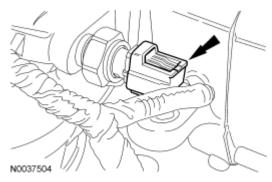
Locating Transaxle Pressure Switch Electrical Connector Courtesy of FORD MOTOR CO.
